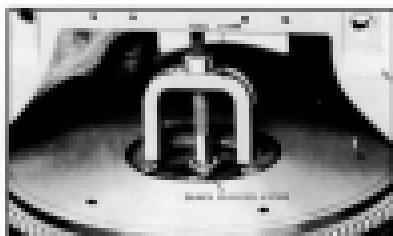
Removing Clutch Shaft Pilot Bearing with Tool J-1148.
